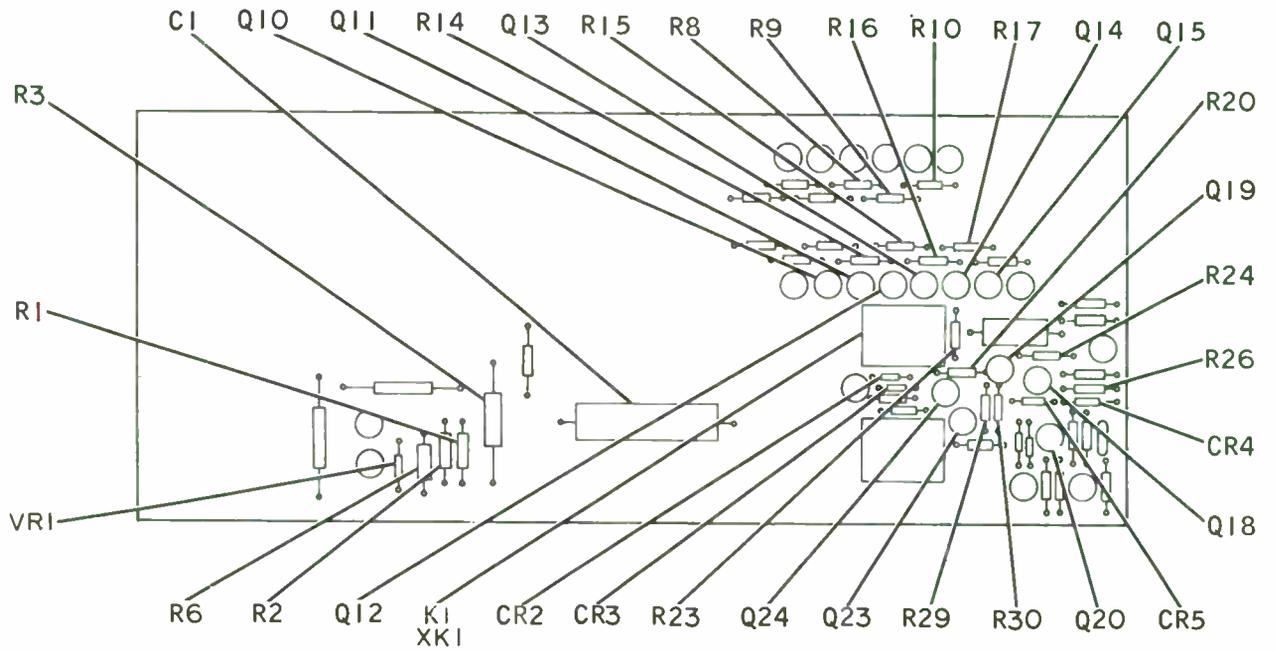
Lampdriver Board (Sheet 1 of 2).
